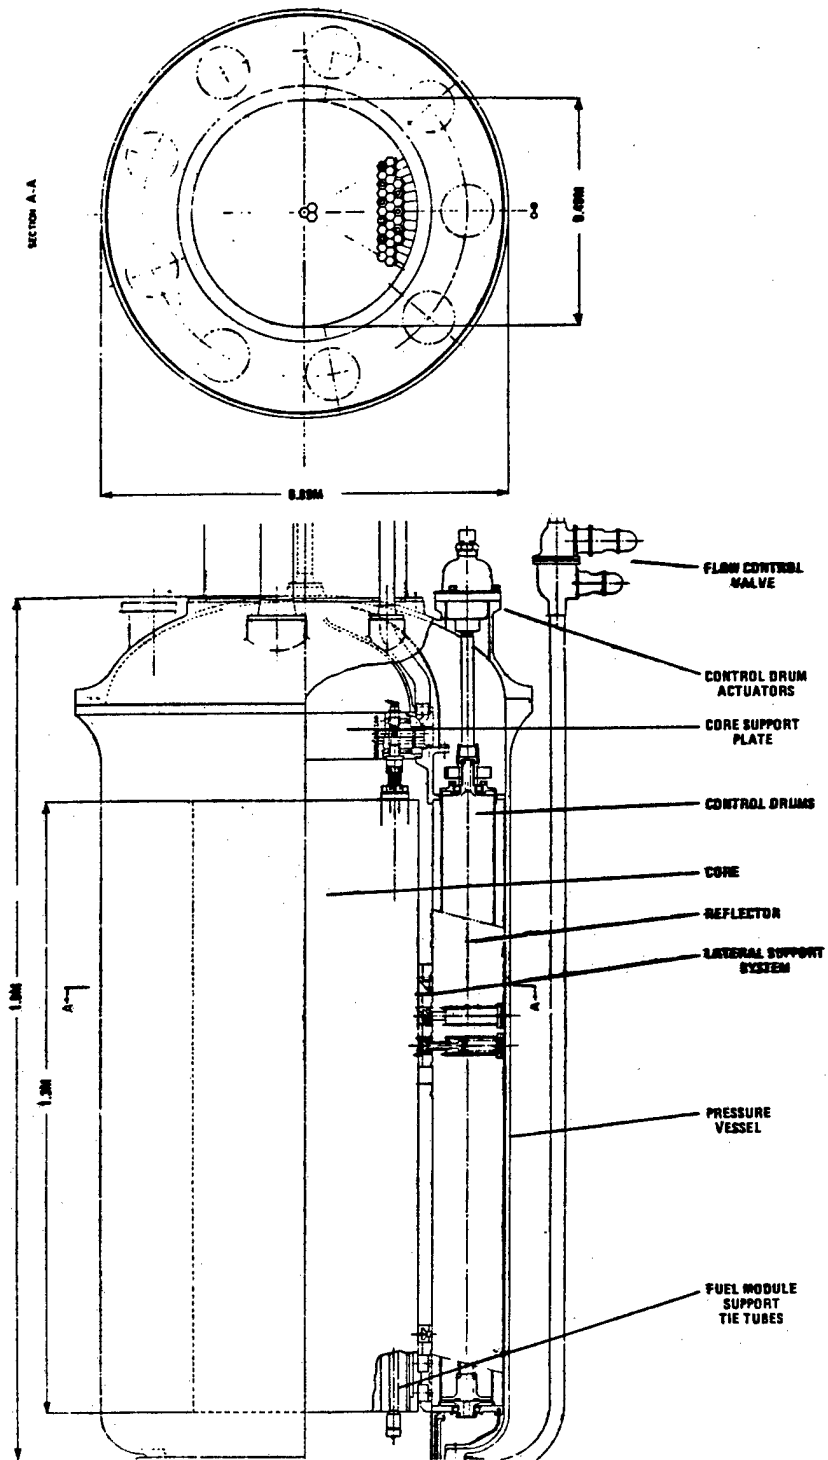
Layout of Reactor Cross Section and Elevation for Small Nuclear Engine Similar to Proposed Heat Source
